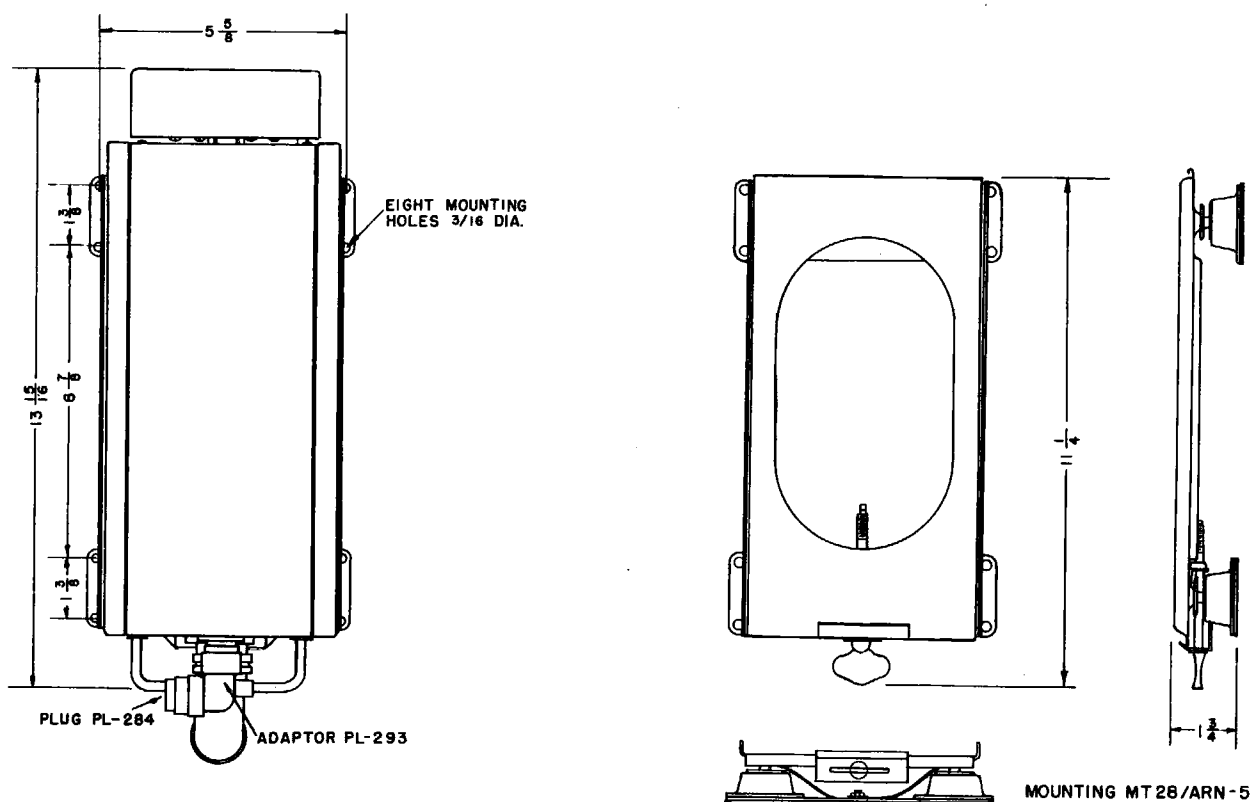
Radio Receiving Equipment AN/ARN-5A—Outline Dimensional Drawing
